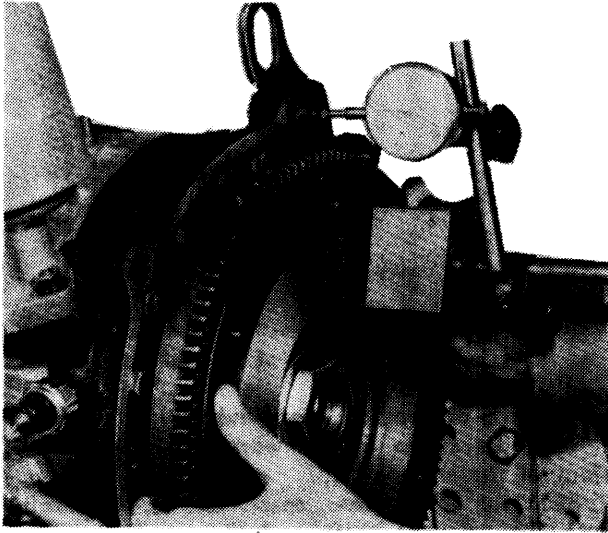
Measuring Eccentric Shaft End Play with a Dial Indicator
